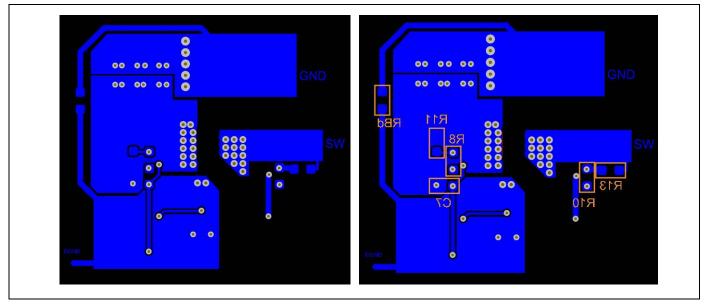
Bottom layer of the PCB - top view (trace on the left and silk mask on the right)
